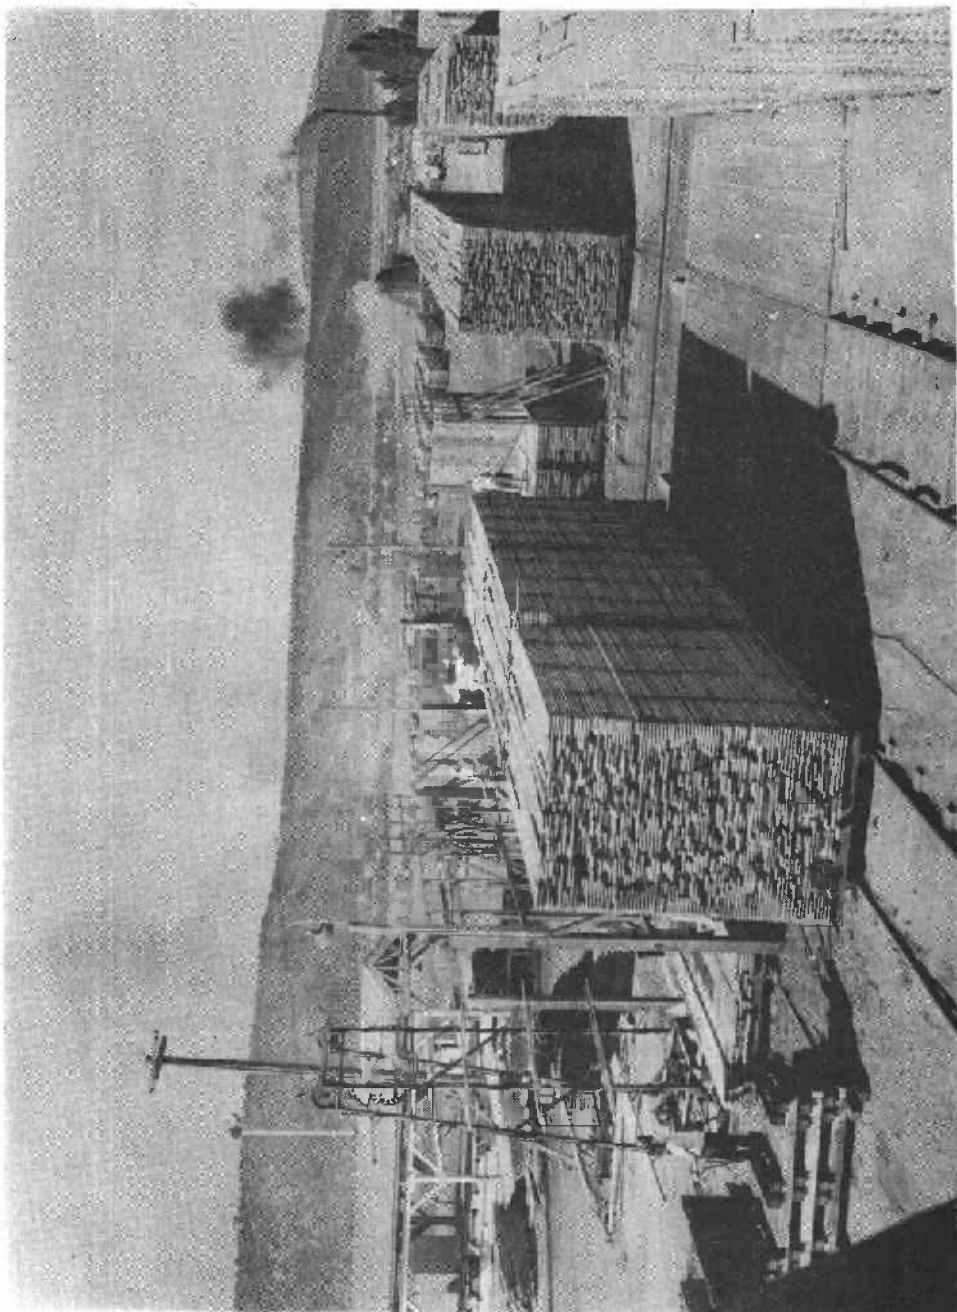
Kiln-truck loads box-piled using board lift. Sticker guide on one side, bumper on one end.
